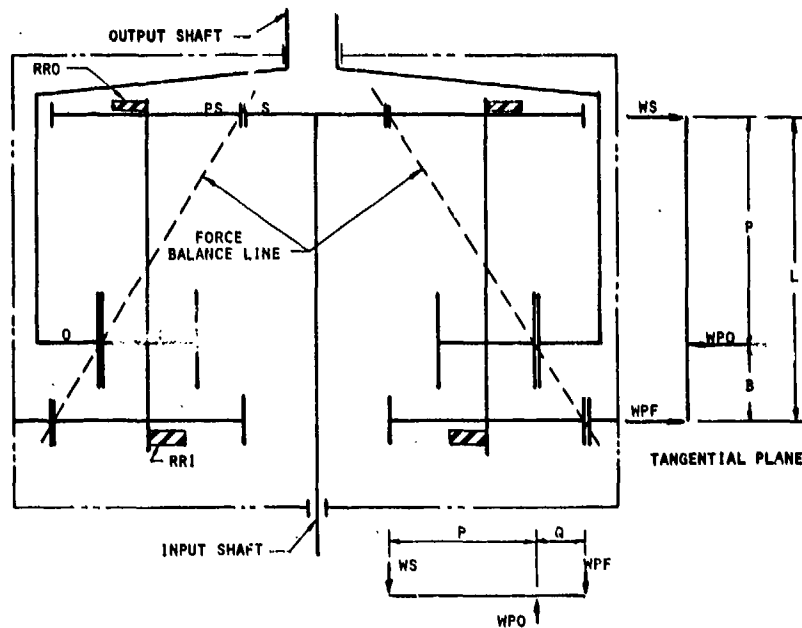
Schematic arrangement of self-aligning, bearingless, planetary gear - tangential plane.
